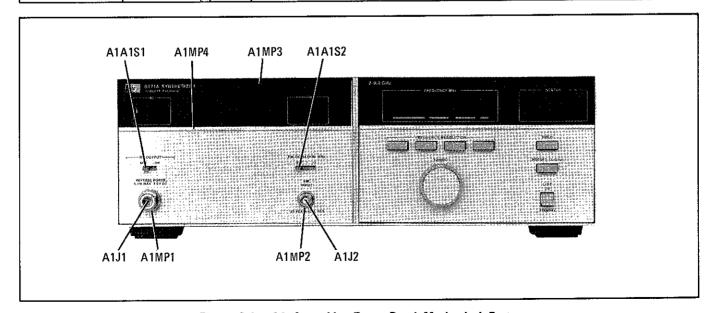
A1 Assembly, Front Panel Mechanical Parts
